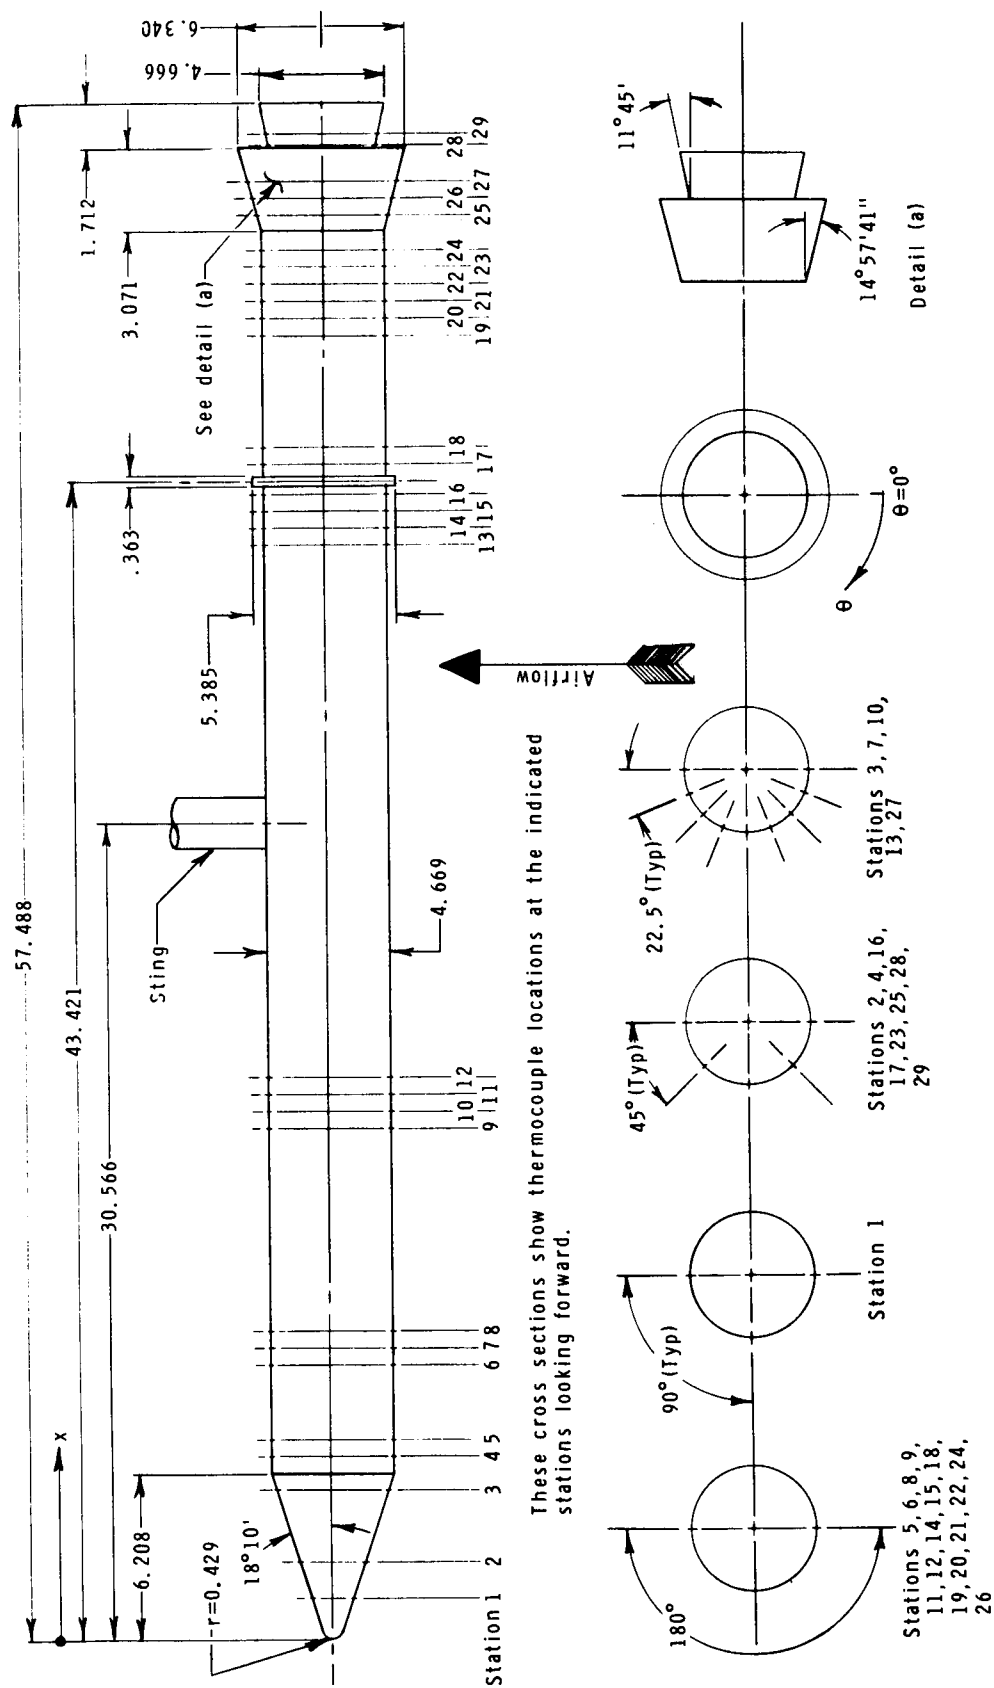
Drawing of models showing sting arrangement and thermocouple locations.
